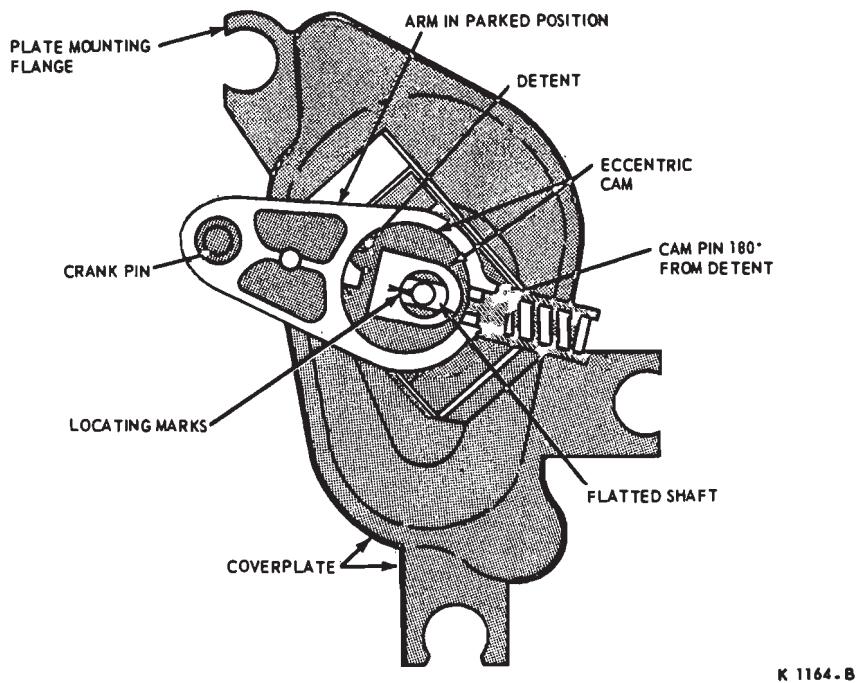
Windshield Wiper Motor Output Arm in Parked Position
